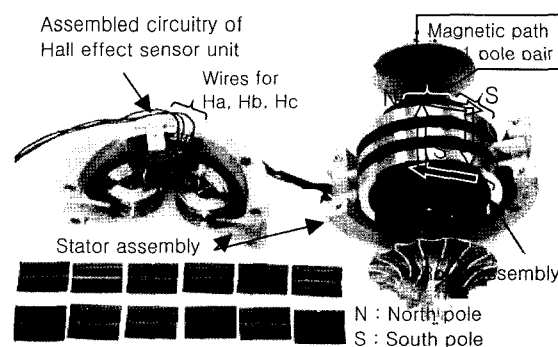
Photograph of the overall structure of a fan cake Brushless DC Motor with axial air gap
